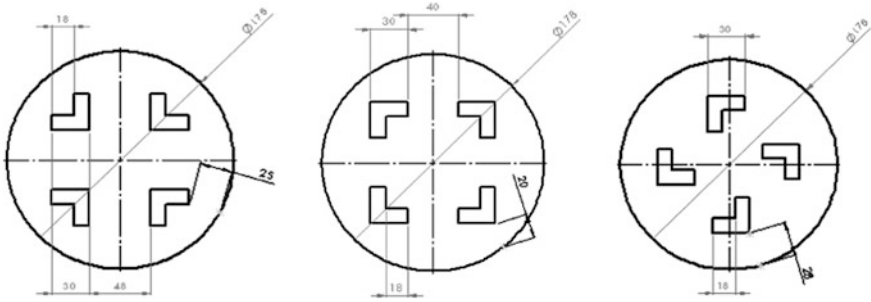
Technical drawing of the multi-hole dies (from *left to right*): flat layout, around the center of gravity layout, radial layout
